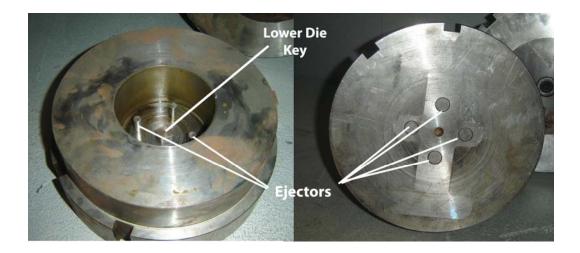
Locations of the Moving Parts of Lower Coining Die Set
